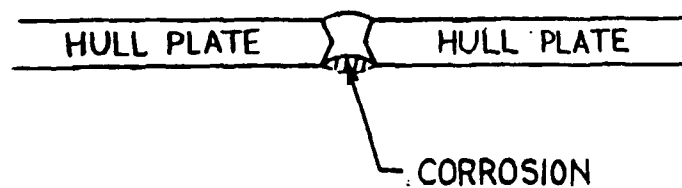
Corrosion of hull plate weld with CP (seawater)
